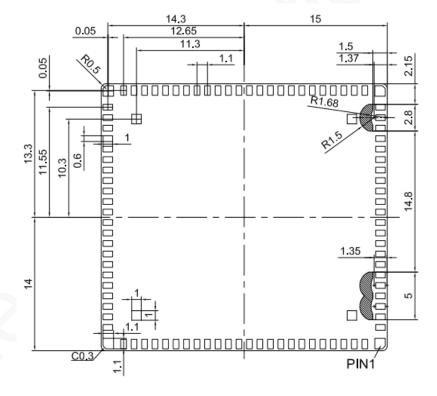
Bottom view of N728-LA PCB package (unit: mm)
